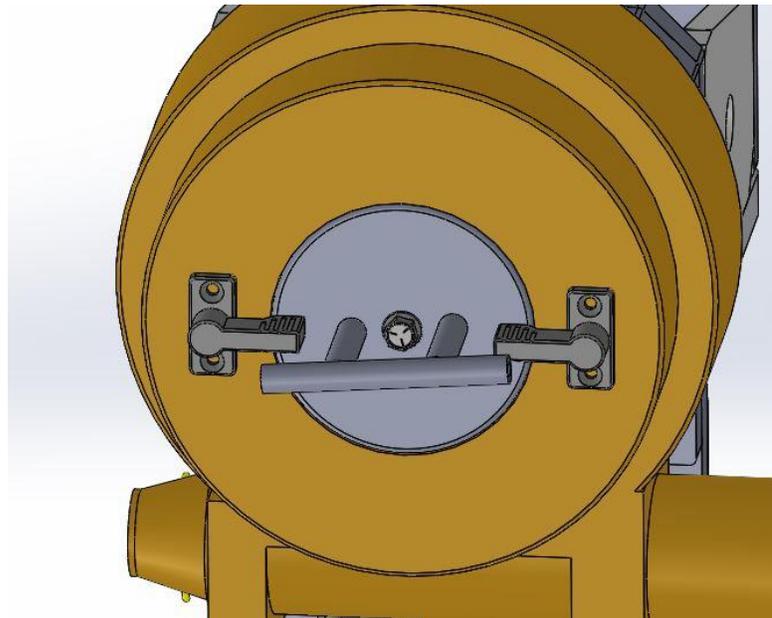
Final Drive End Design, Outboard Side, Hydraulic Gearbox
